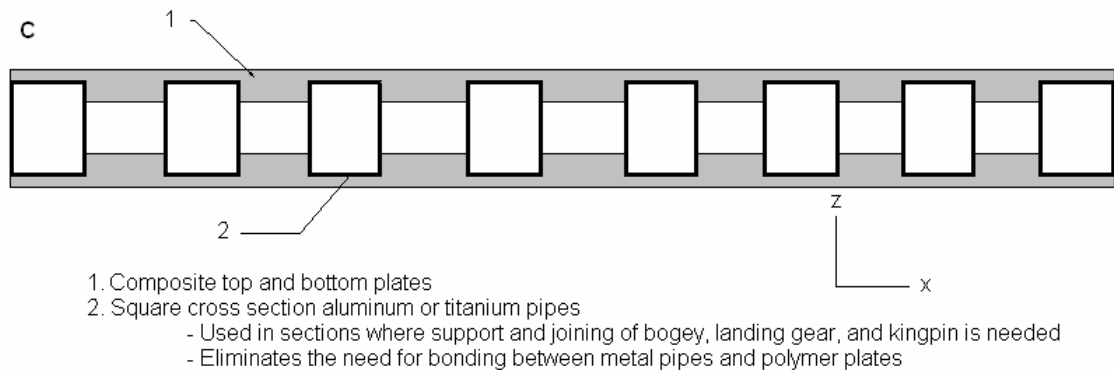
Sandwich Composite Structure with Aluminum Tube Core Construction for Flooring Platform Applications. Design concept C.
